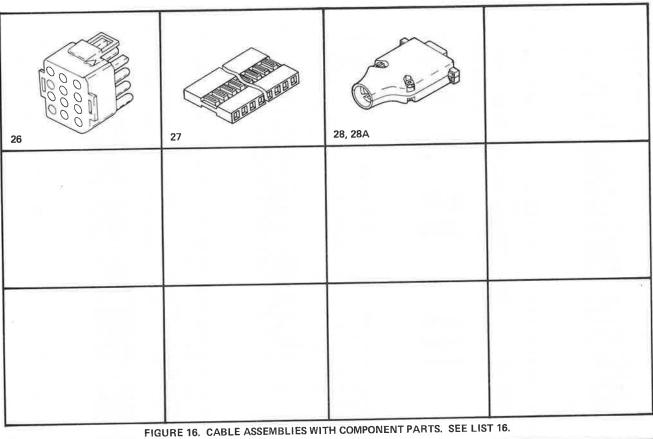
CABLE ASSEMBLIES WITH COMPONENT PARTS. SEE LIST 16.
